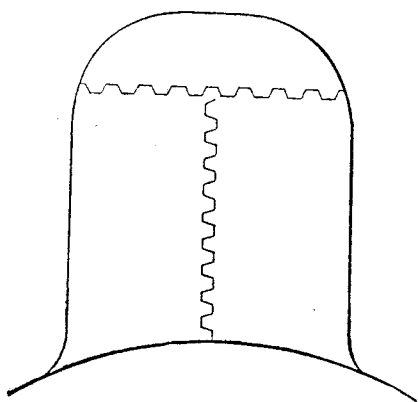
Dovetail brazed joints on sheet metal dome cover.
